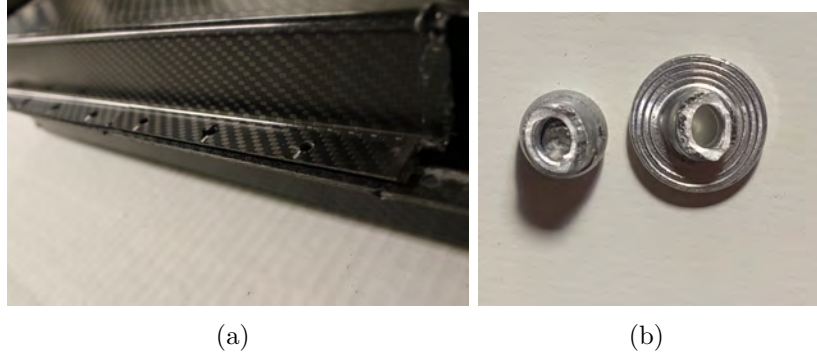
Rivet shearing in rivet samples: (a) all the rivets sheared off along one side of the flange; (b) a sheared rivet.
